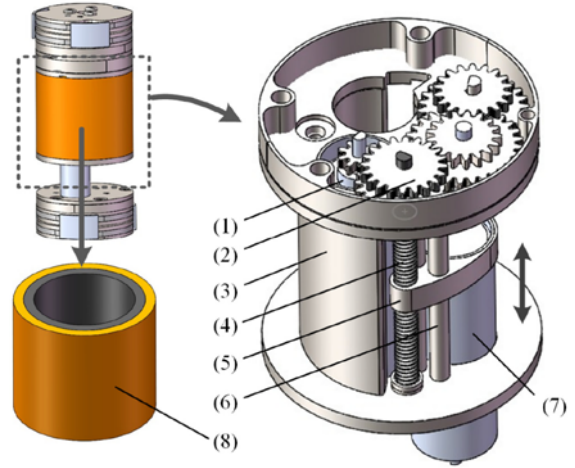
Structure of the AMM: (1) coreless DC motor; (2) gear reducer; (3) fixed block; (4) lead-screw; (5) nut; (6) guide rod; (7) coreless DC motor of the front RMM; (8) magnetic core and receiving coil of wireless power system
